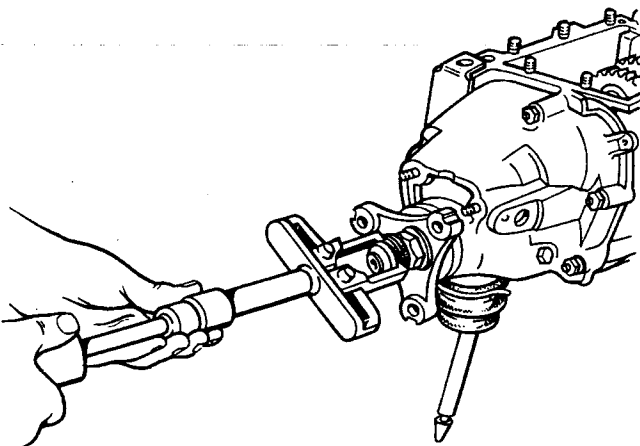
Removing Aligning Ring of Propeller Shaft Flexible Coupling with Remover Tools A.40006/1 and A.40005/4
